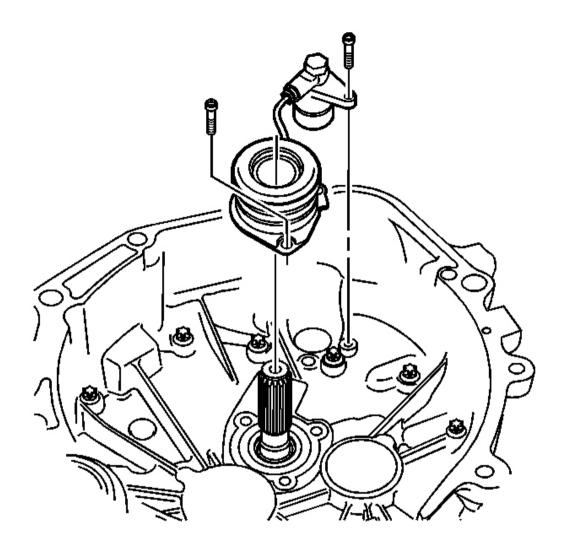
View Of Actuator And Tube Courtesy of GENERAL MOTORS CORP.
